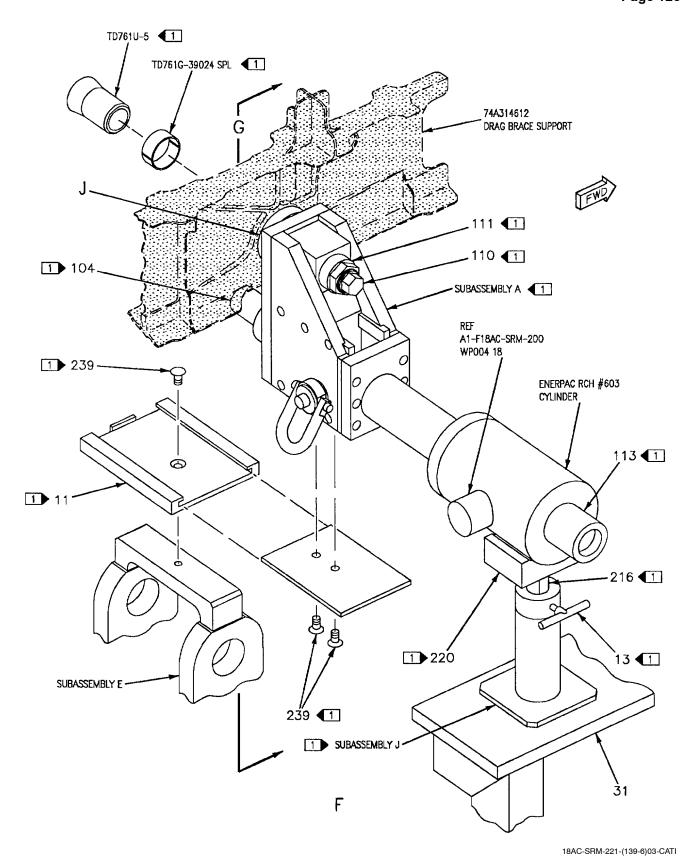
Drag Brace Support Fitting Reaming (Sheet 6)
